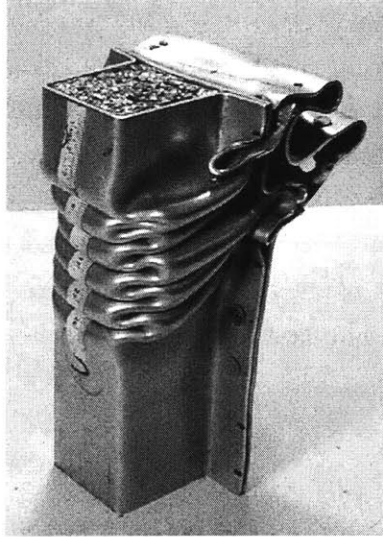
Crush deformation of single-hat foam-filled member (Specimen S2)
